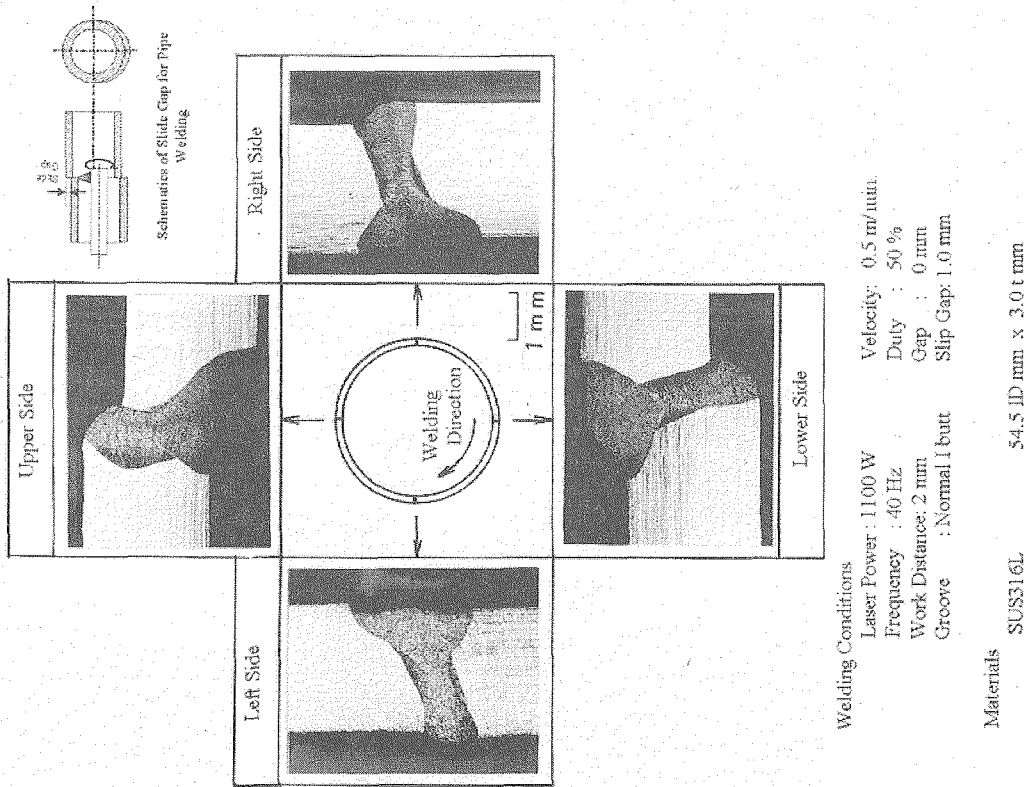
Cross section of the weld joint made by Laser Beam with 1.0mm Slip Gap
